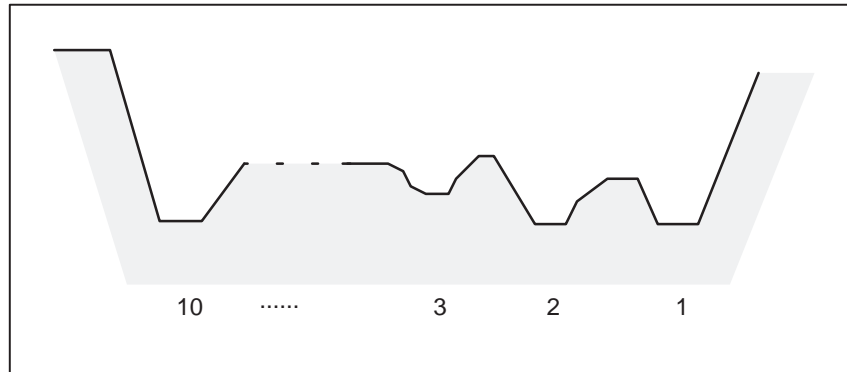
(b) Number of Pockets in Stock Removal in Turning (Type II)
